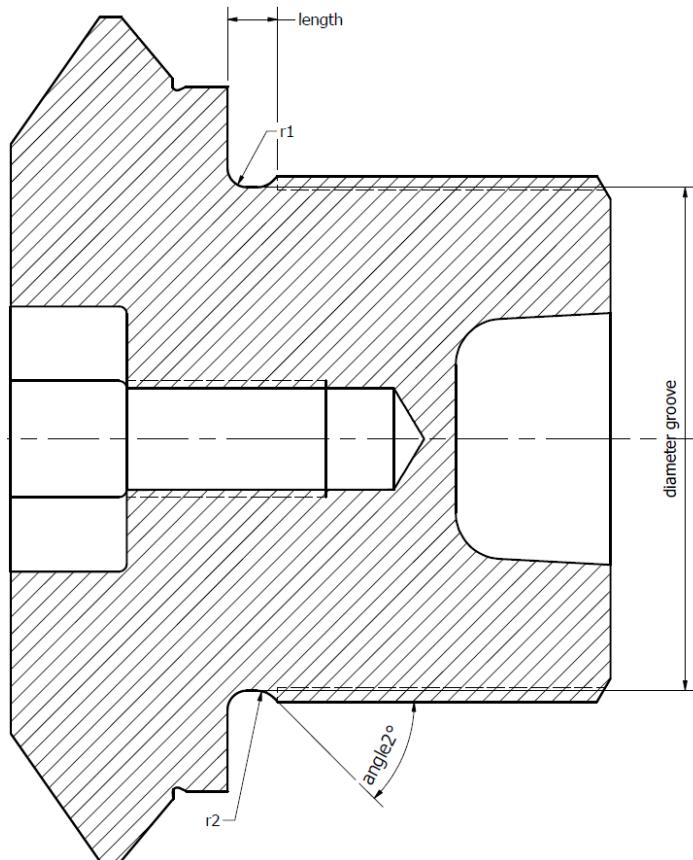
Parameters of the groove on a drawing of a locking bolt.
